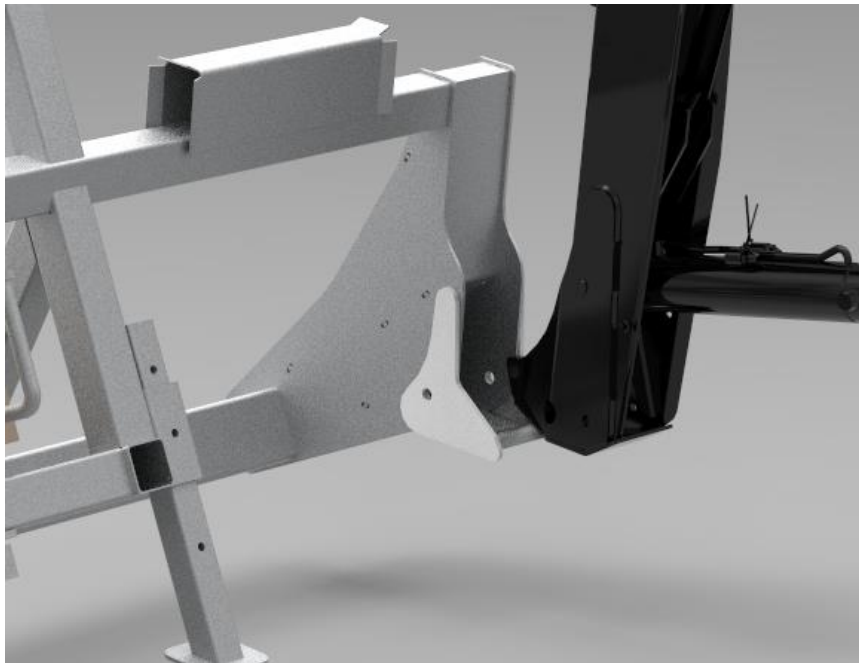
Example of tractor approaching attachment and lining the lift linkage up with the boot. Wheel removed for clarity.
